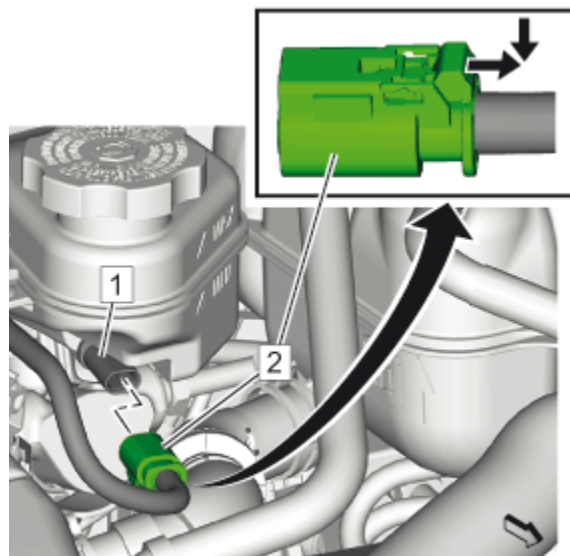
Electrical Connector And Brake Fluid Level Sensor
